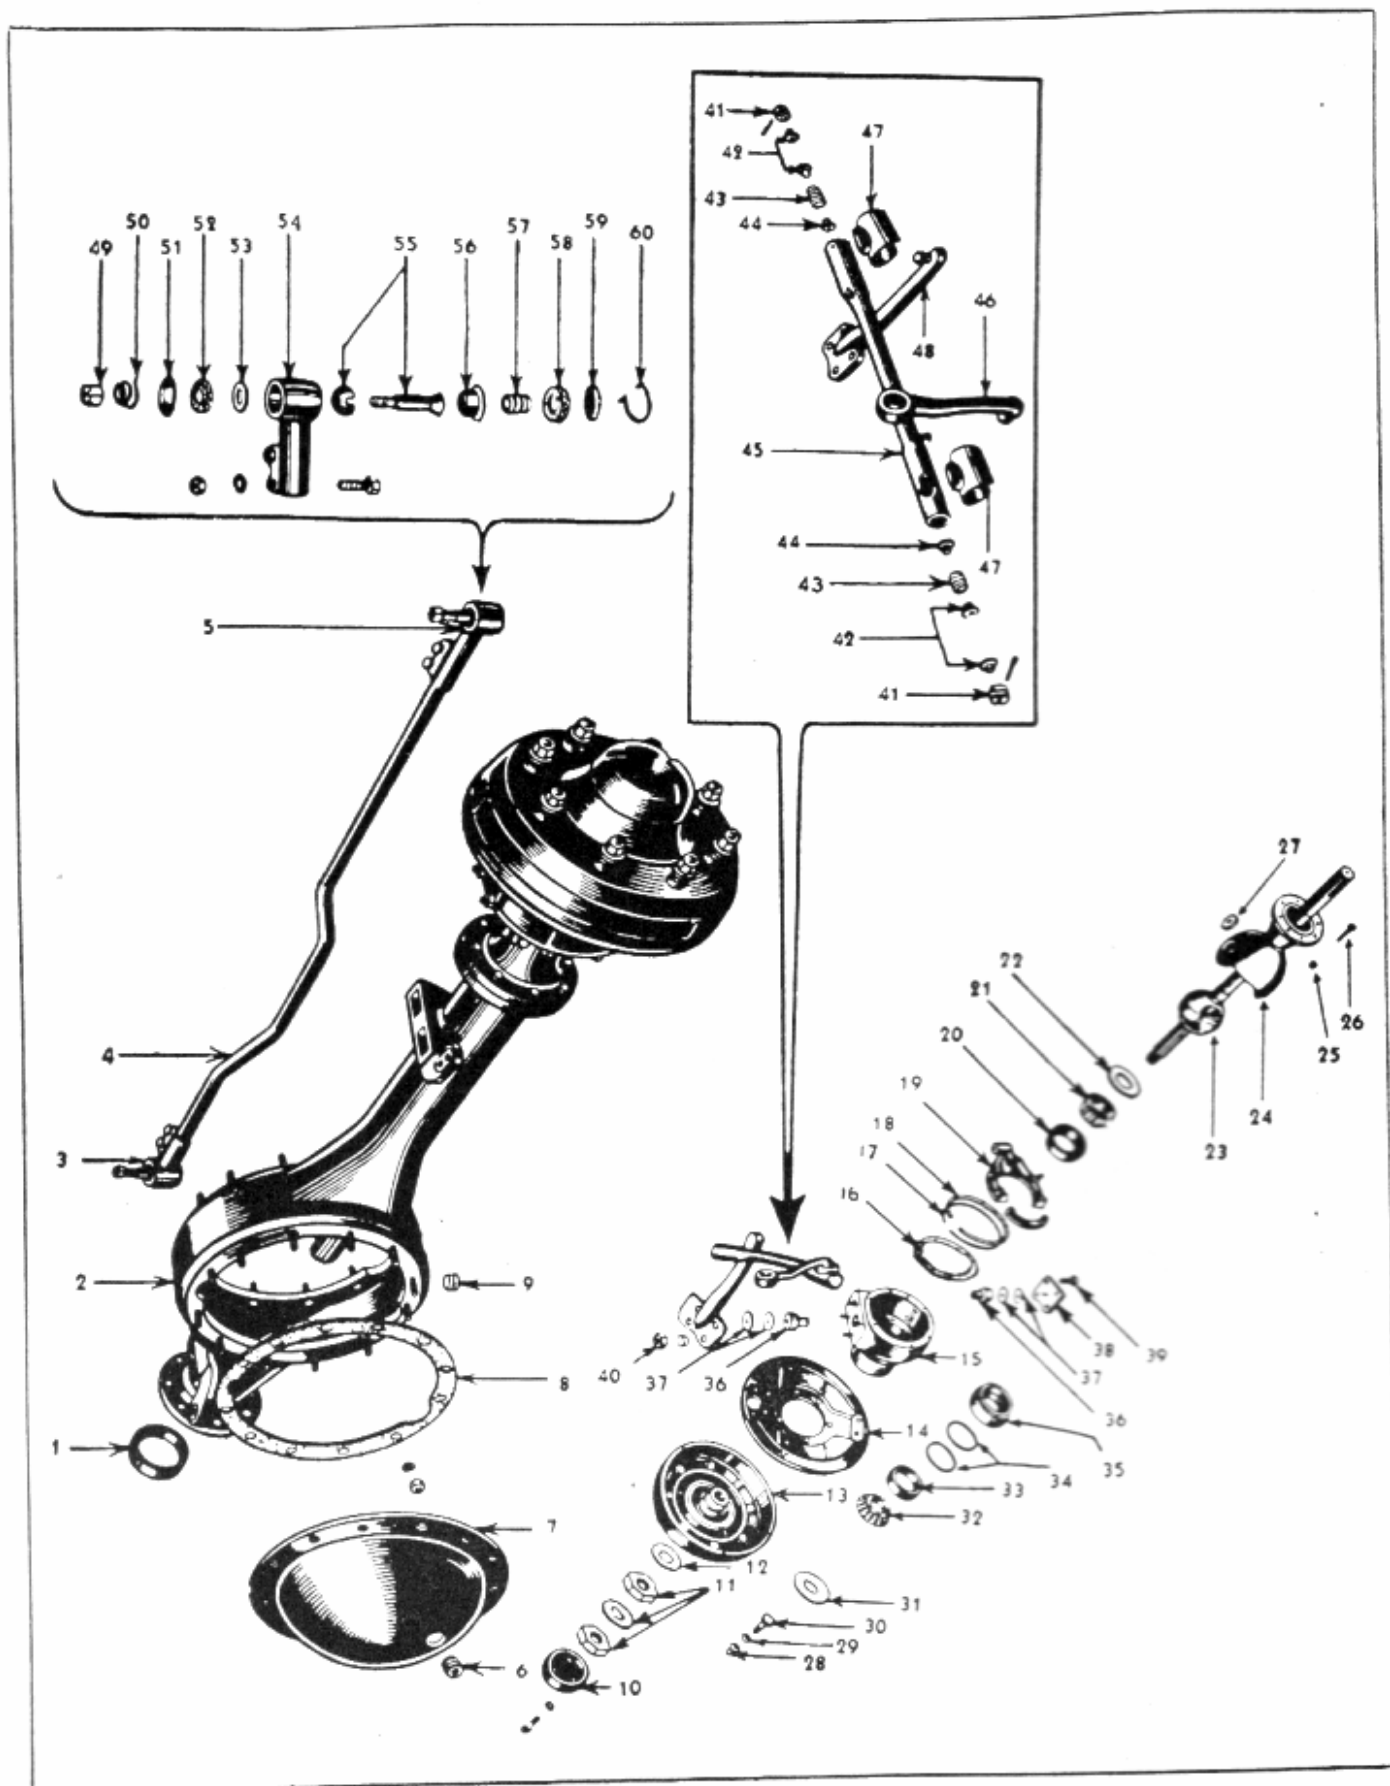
Exploded View of the Front Axle Assembly, 5" Joint.
